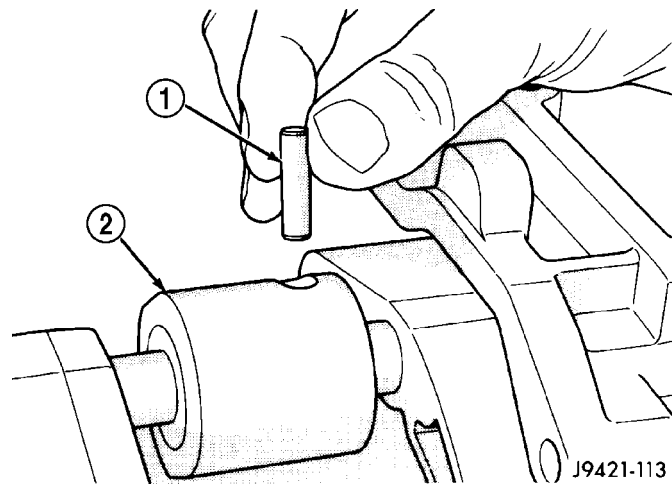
STARTING ROLL PIN IN SHIFT SHAFT LEVER
